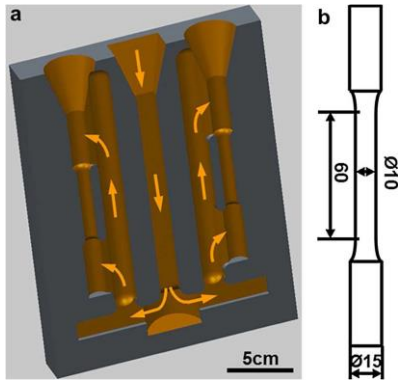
(a) Permanent mould made according to ASTM B–108, and (b) key dimensions of the gravity casting tensile test bar made by the mould.
